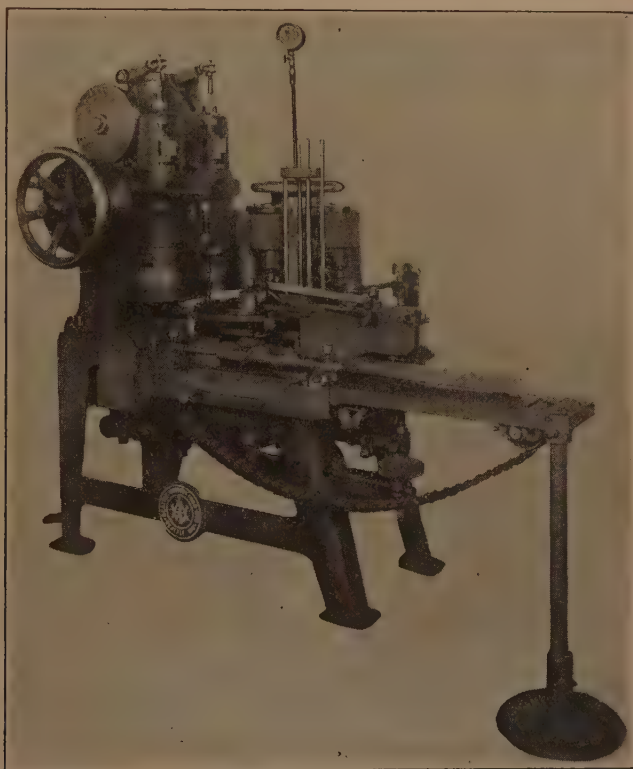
Automatic can sealing machine. (Courtesy, The Seattle Astoria Iron Works).
